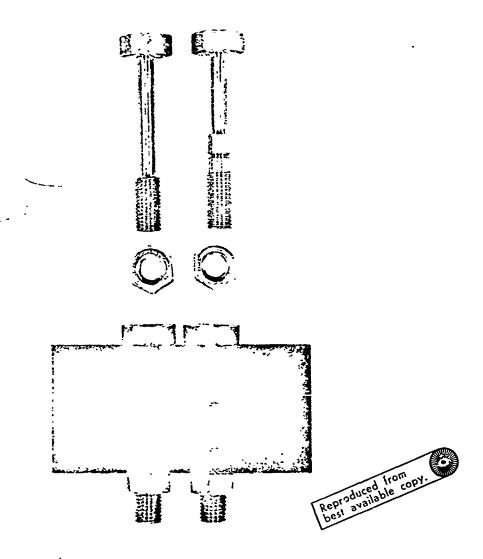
PHOTOGRAPH OF UNMOUNTED AND MOUNTED STRESS CORROSION SPECIMENS.
